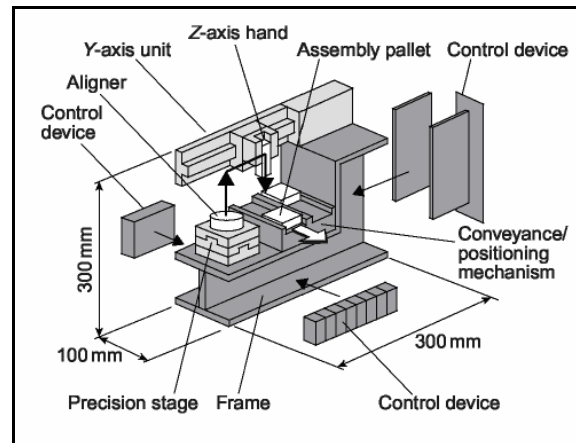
Fujitsu Low-Cost Micro-Assembly Machine
